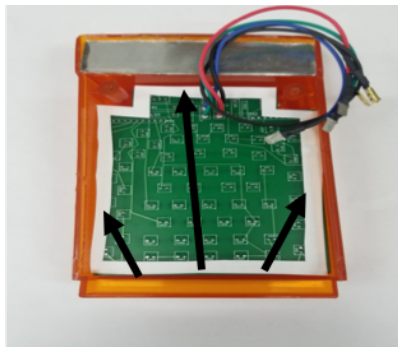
Apply half inch strip of Clear Silicone (or hot glue) in corners to hold boards in place.
